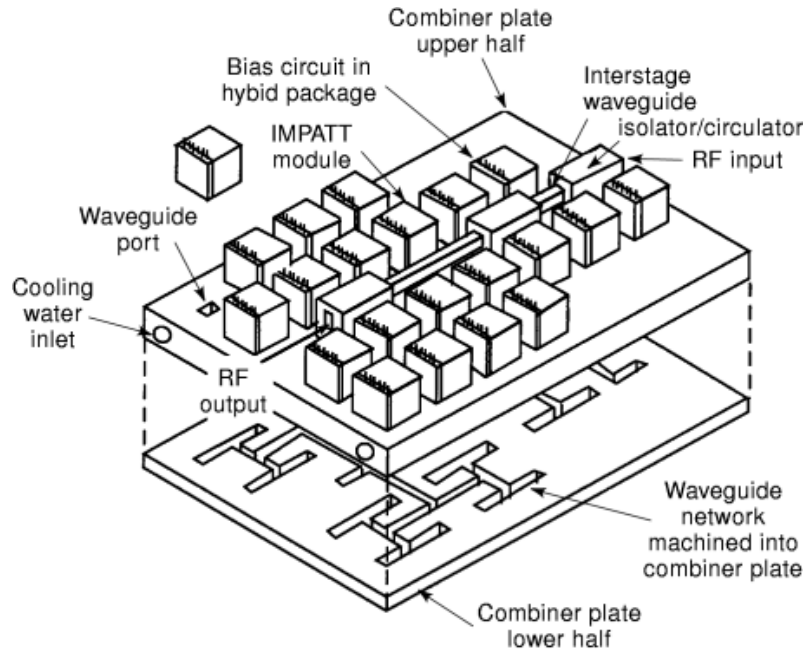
Concept drawing of an IMPATT transmitter using a combiner plate.
